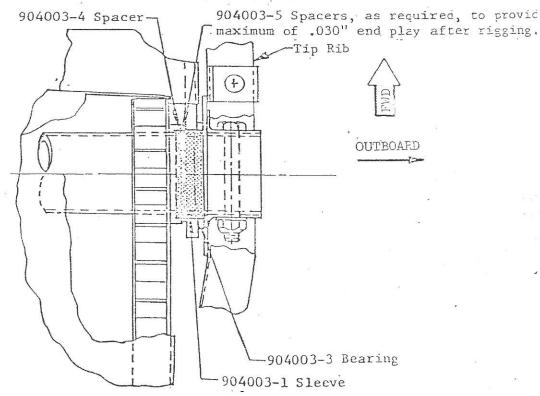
LH & RH ELEVATOR OUTBOARD BEARING REPAIR (RH SHOWN, LH Opposite)
